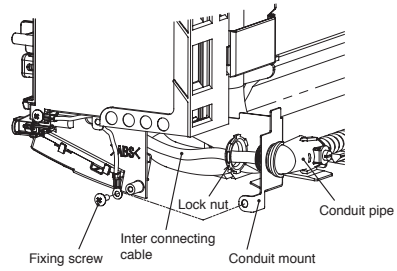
Construction of RAS-15, 17, 22LKV-UL
